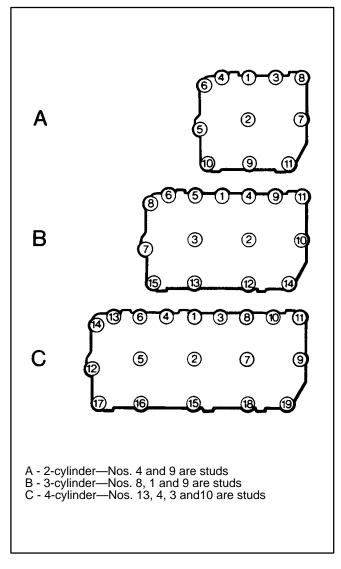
CRANKCASE DOOR TIGHTENING SEQUENCES
